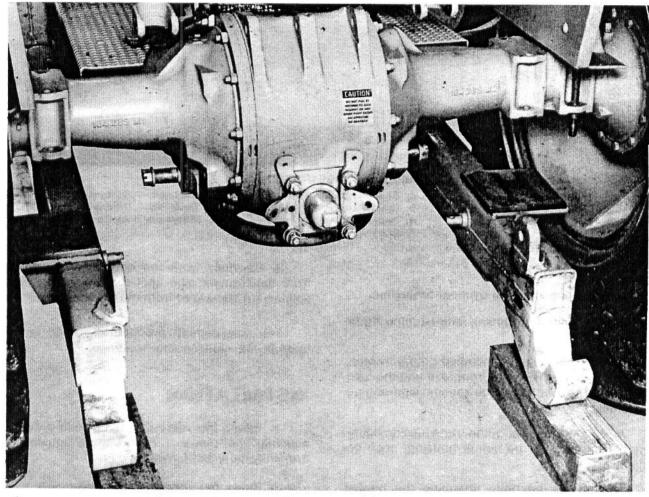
DRIVE AXLE ASSEMBLY WITH LOADER FRAME REMOVED
